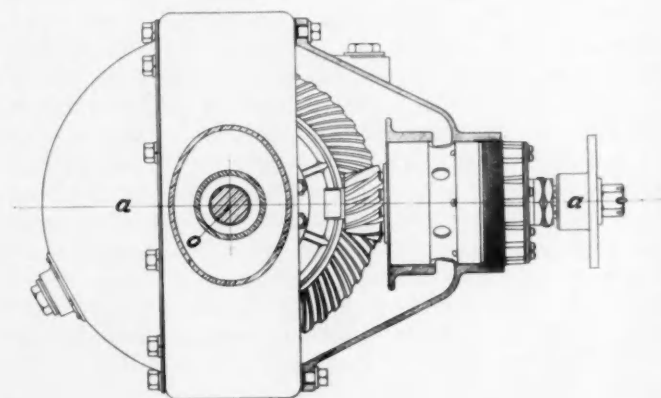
Spiral-Bevel Rear Axle with Overhung Pinion Mounting
